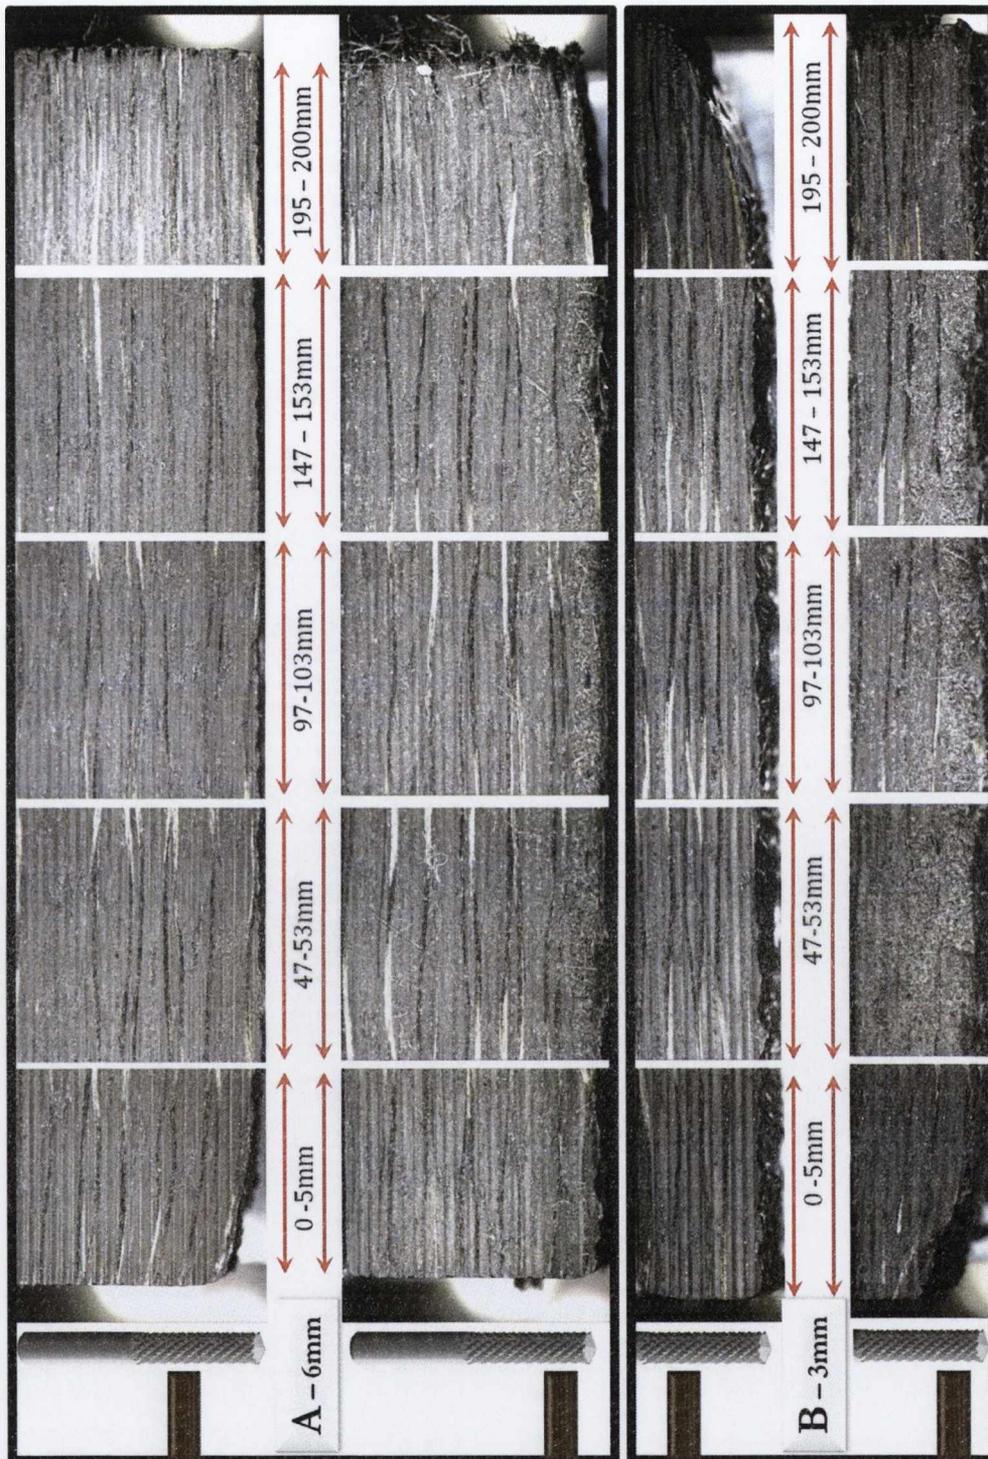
Edge trimmed surfaces with indications of difference in quality due to axial variation for (A) 6mm & (B) 3mm thick samples.
